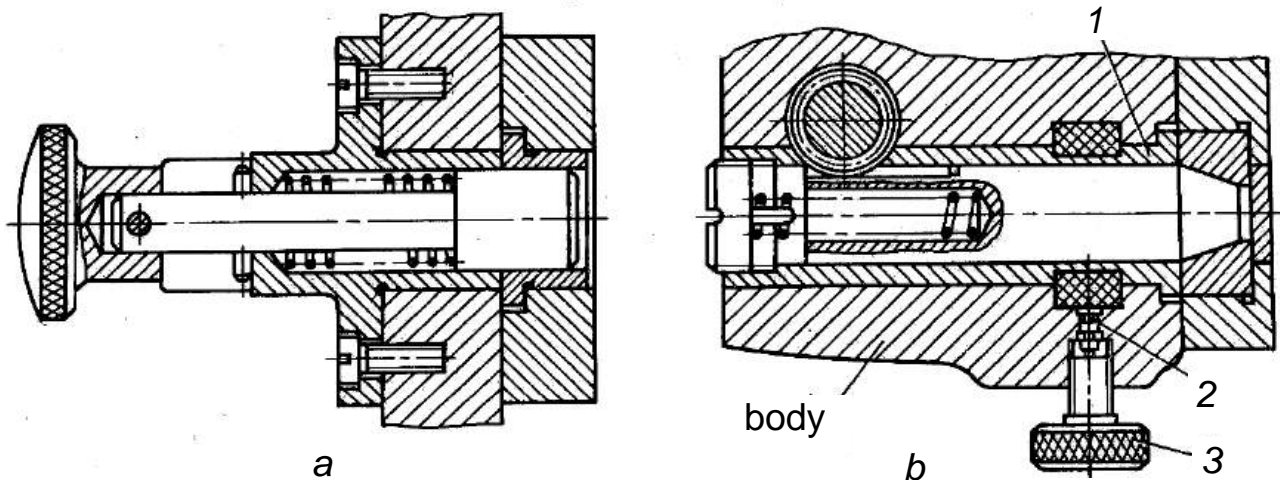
Designs of retainers: a – cylindrical pull-type; b – conical toothed
